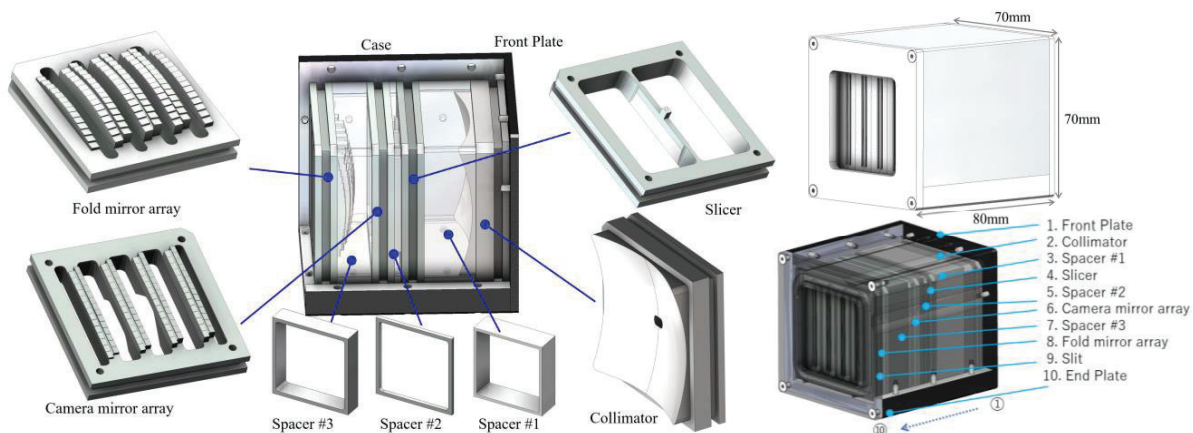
Ultra-Compact machined slicer IFU/MISI-36 Configuration
